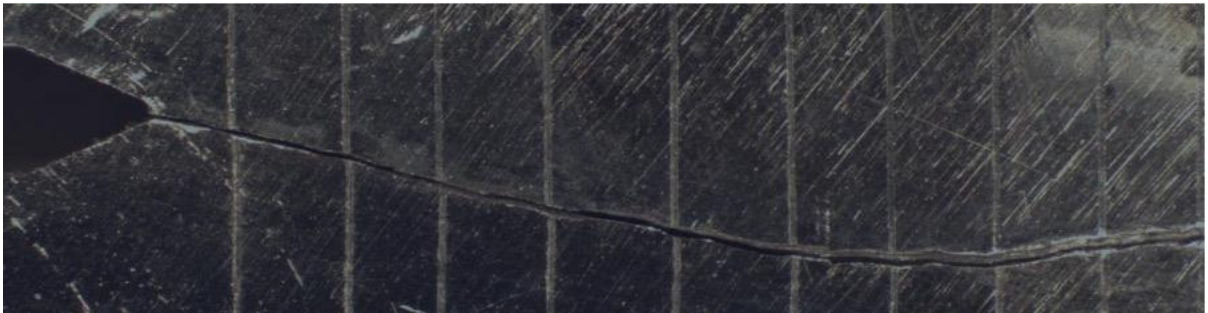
Fatigue crack for 6.0 m/s specimen 2
